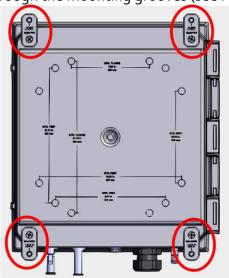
AID (BACK VIEW) MOUNTING LEGS HIGHLIGHTED
